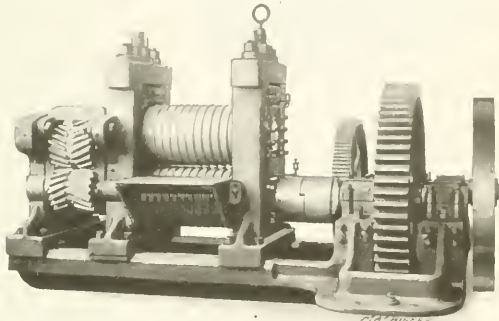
Single-end Rifle Barrel Rolling Mill built by Williams, White & Co.
